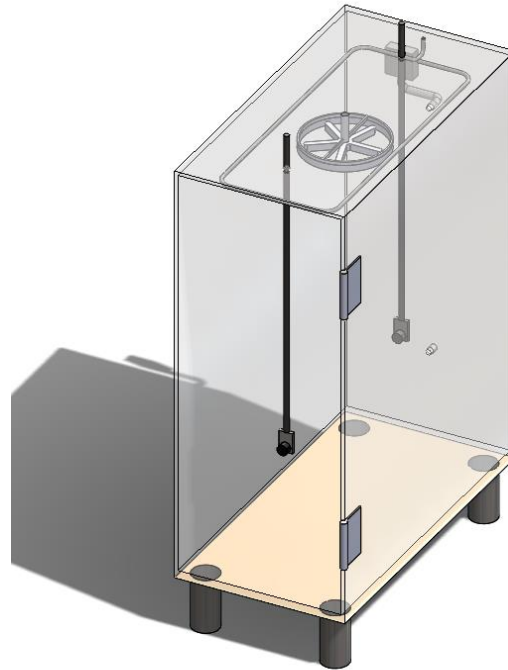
MODEL OF REDESIGNED TEST BOX
